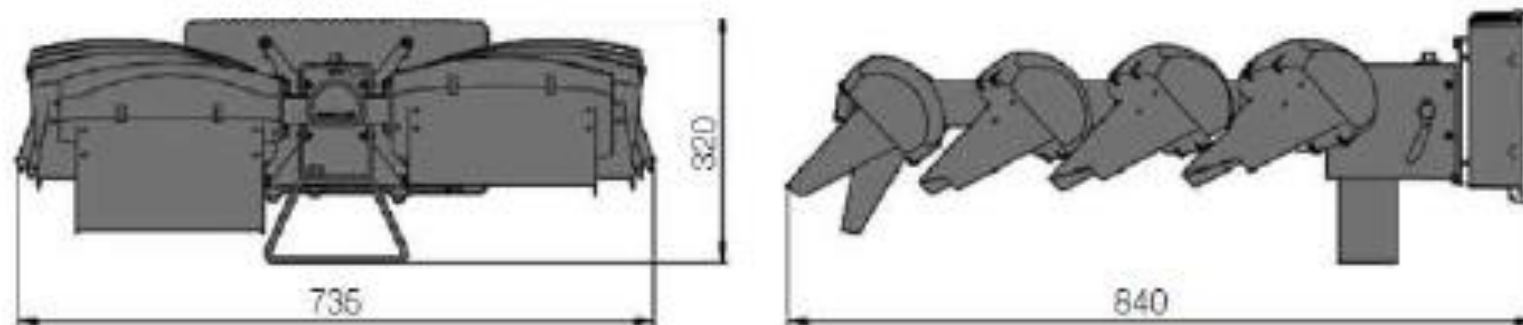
Proposed Floodlight Dimensions and shielding Layout (Abacus Lighting 2021).
